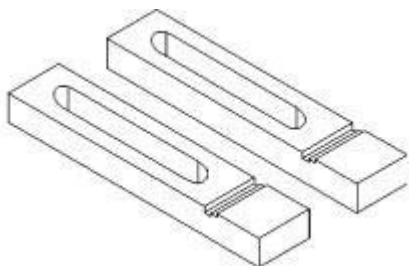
Crankshaft Real Seal Retainer Alignment Fixture 8225
